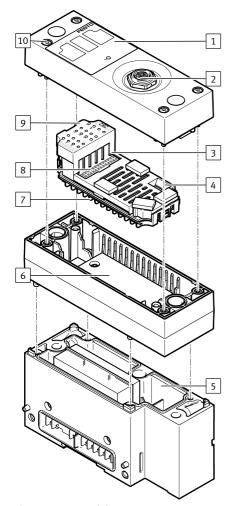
Output module CPX-FVDA-P2 in a pneumatic interface VABA-S6-1-X...-F1/F2-CB of the valve terminal VTSA-F-CB
